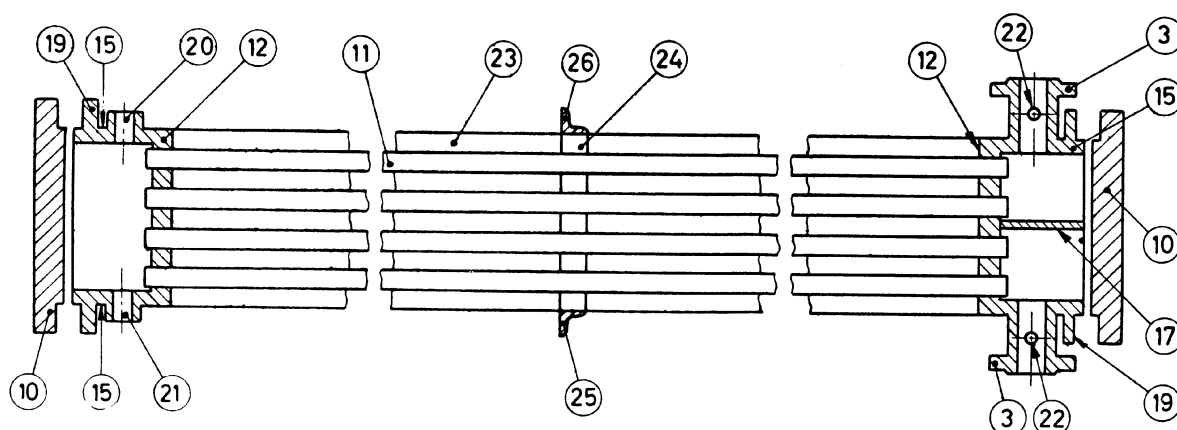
TYPICAL CONSTRUCTION OF A TUBE BUNDLE WITH REMOVABLE-COVER-PLATE HEADERS
